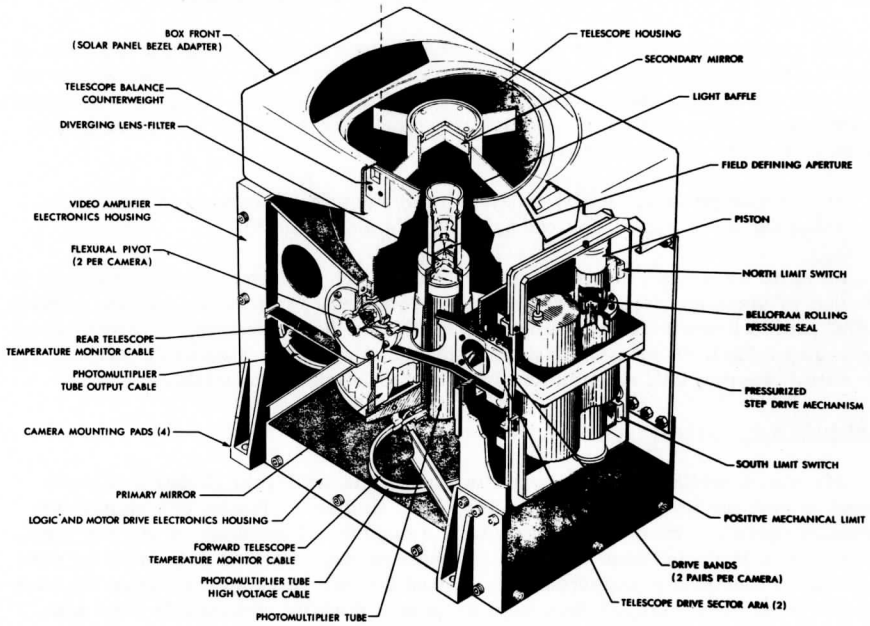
Cutaway Drawing, ATS Spin-Scan Cloud Camera
